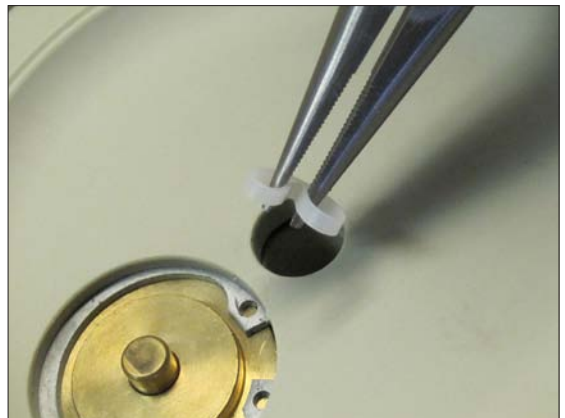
Carefully mount the piston and shaft by hand. Repeat steps Fig 3 and Fig 4 on the remaining side. Carefully secure the endcaps equally on both sides.
